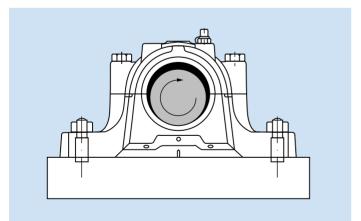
When not using a CARB toroidal roller bearing, loose fits in housing are used to allow the "free" bearing to move axially. The disadvantages of this method are a risk of the outer ring turning in its seating, causing wear of housing and vibration
